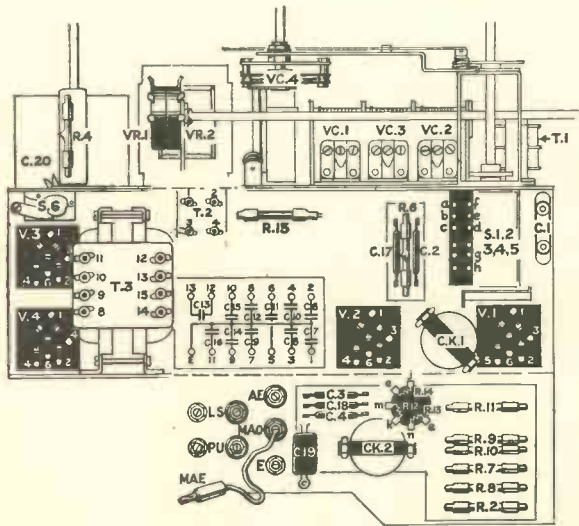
LAYOUT OF PLAN OF COMPONENTS.
